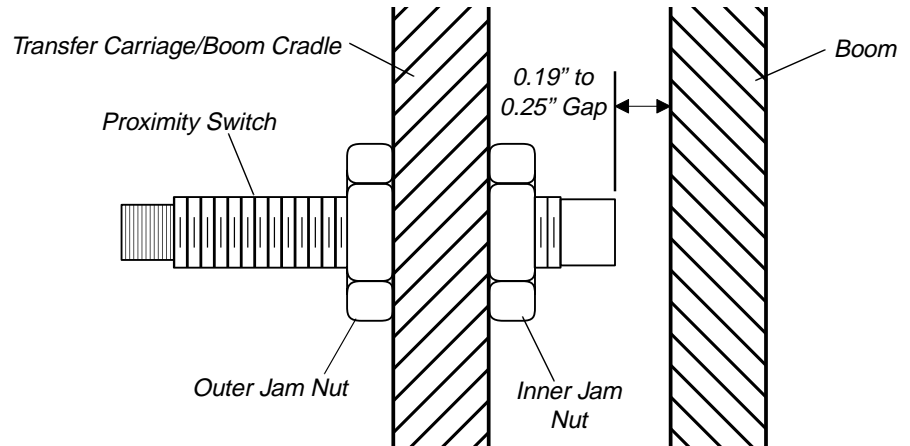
Boom Elevation Proximity Switch Adjustment
